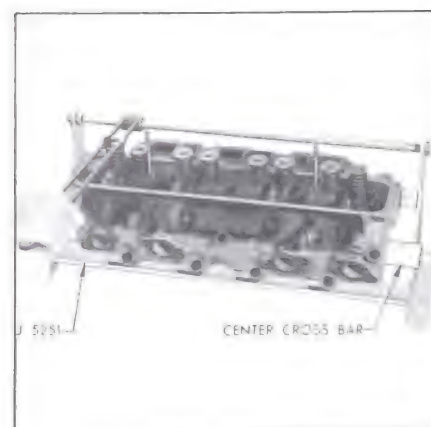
A—Removing Valve in Holding Fixture J 5251
